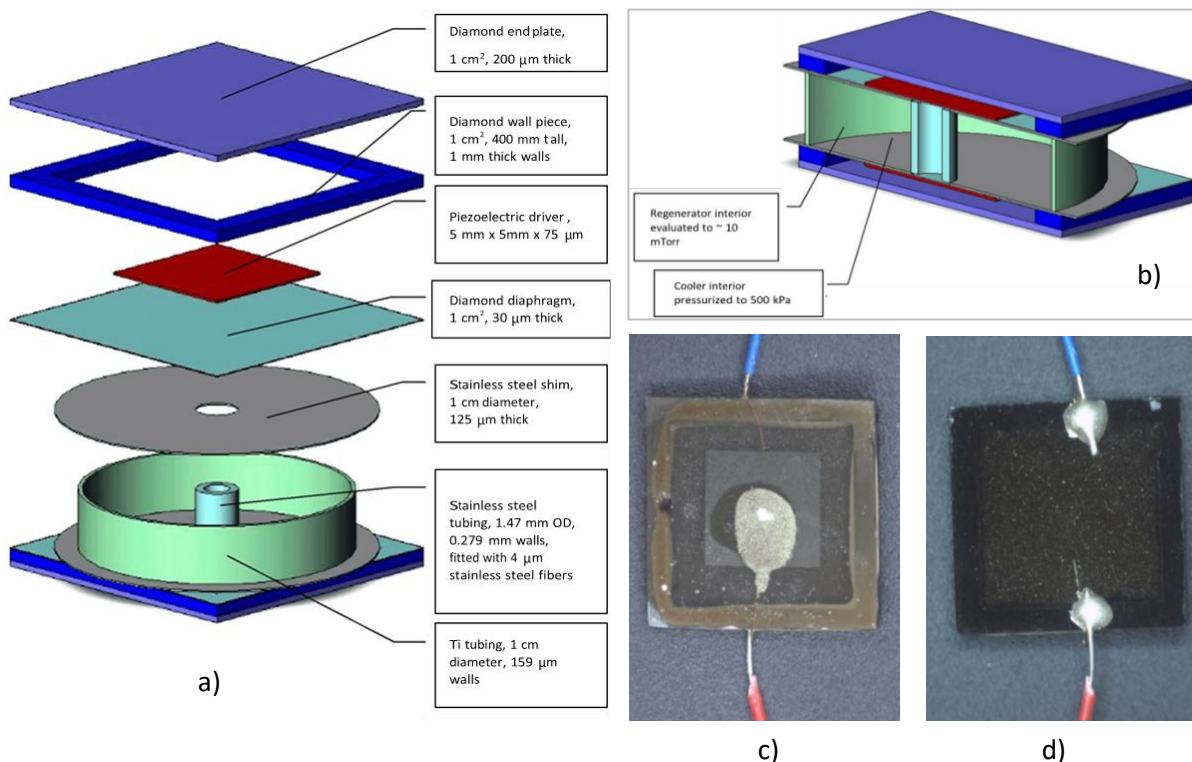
a) Side view and b) Blow-apart views of the final design of the diamond-based MEMS Stirling cryocooler c) The diaphragm side view shows the internal components and d) the backside view shows the external lead attachment [102].
